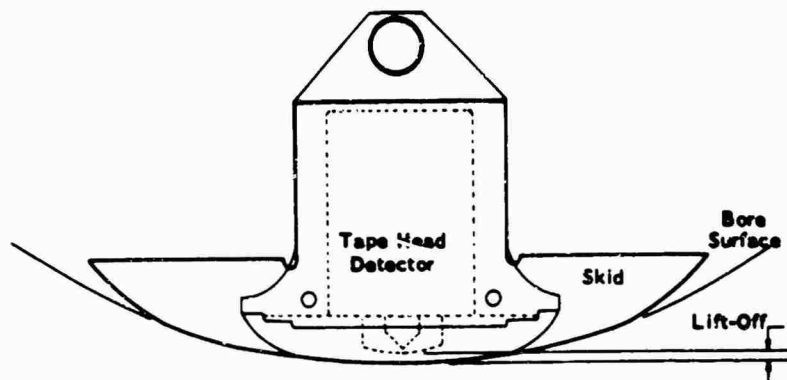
DETECTOR (TAPE HEAD) HOUSING ASSEMBLY OF THE MRB SCANNING UNIT
